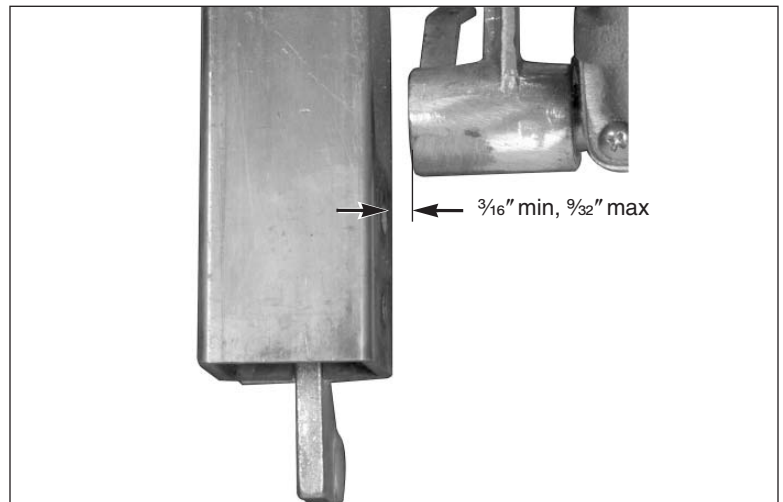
Verifying gap between end of interrupter lever shaft and blade assembly.
